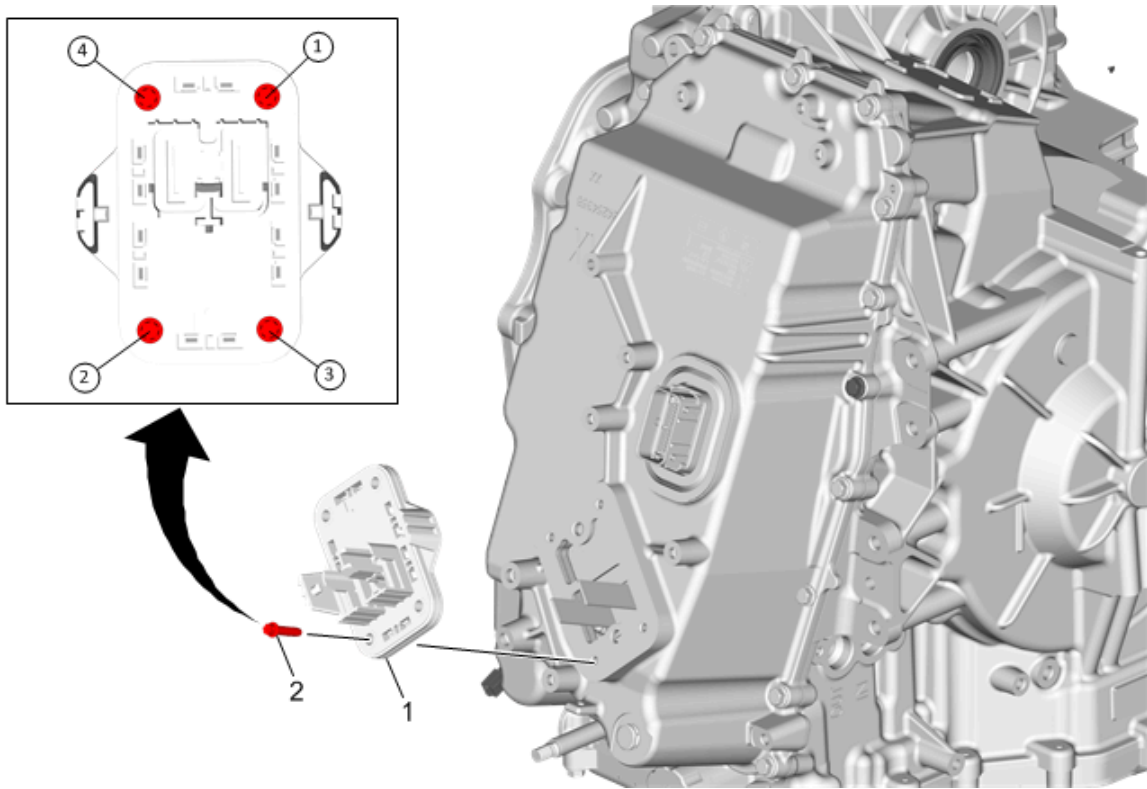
Drive Motor Battery Positive And Negative Cable Connector (With Bolt Tightening Sequence)
